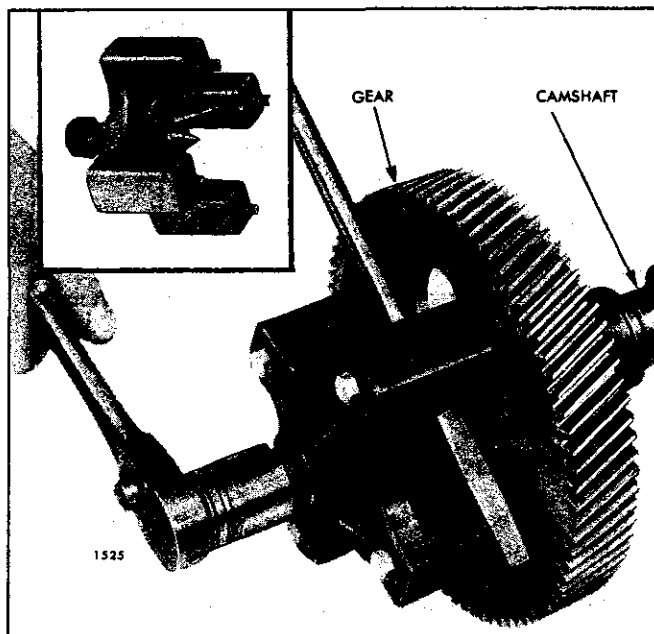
Removing Camshaft Gear with Tool J 1902-01
